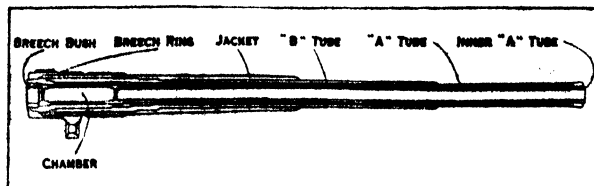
6-INCH STEEL GUN SHOWING CONSTRUCTION
